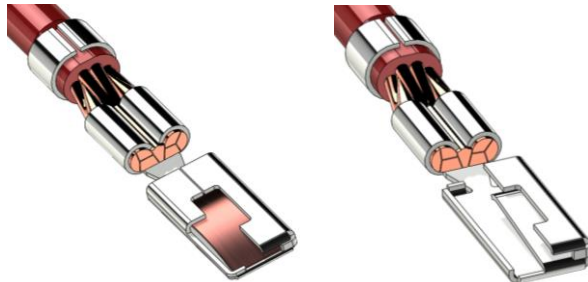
Cutaway views Comparing 2 piece (left) and 1 piece (right) socket contacts.
